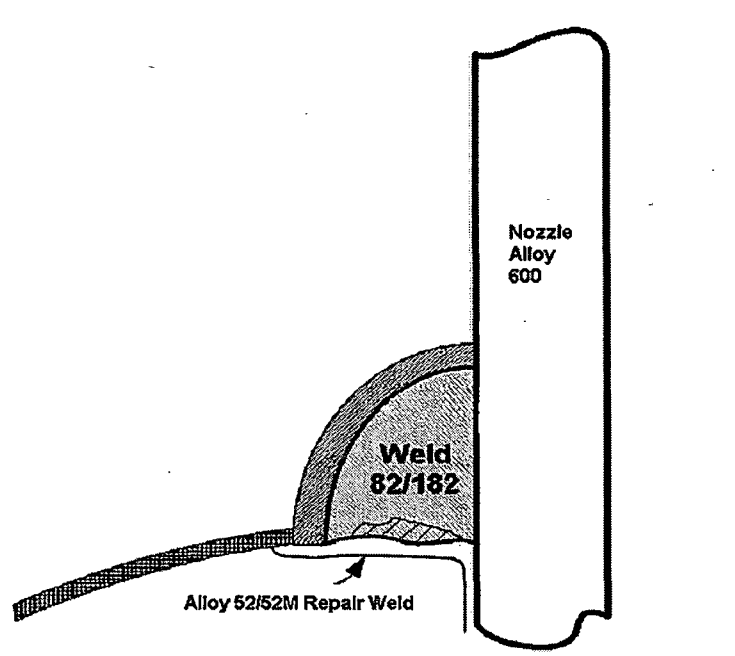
Schematic of Typical Repair Configuration for the Surface Flaw in the J-groove Weld
